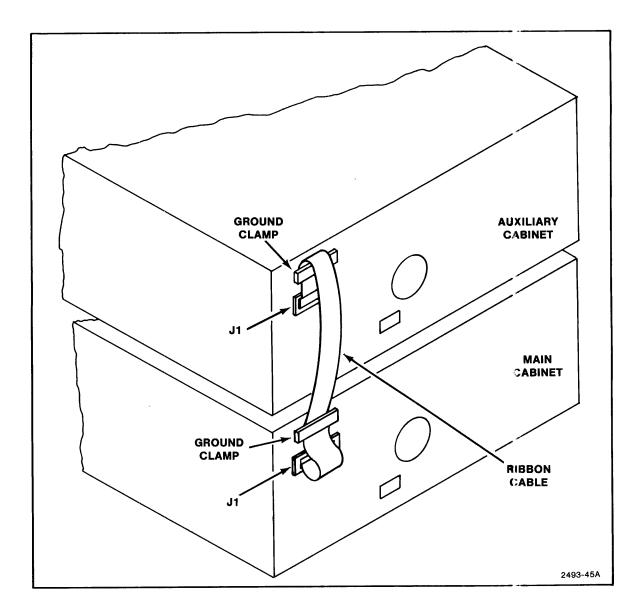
Plugging ribbon cable to connector J-1 on main and auxiliary cabinets.
